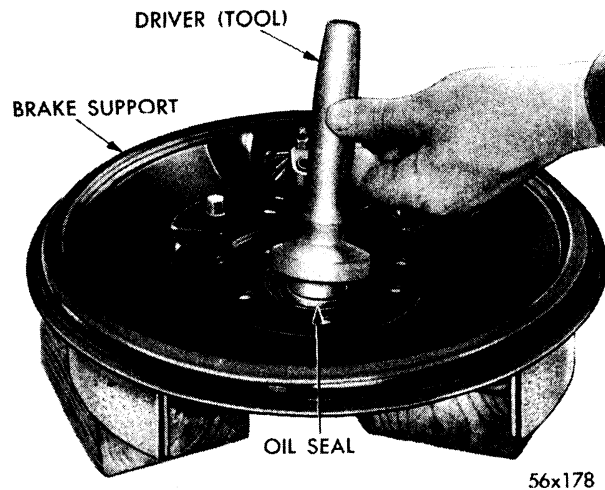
Removing Rear Axle Shaft Oil Seal from Brake Support with Tool C-839
